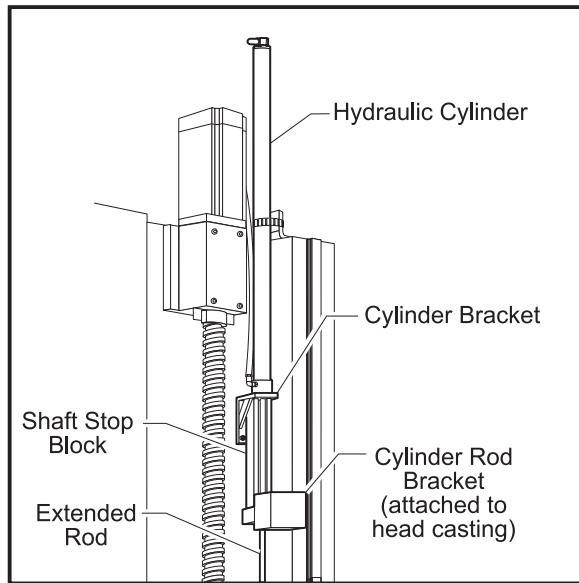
Z-axis motor and components for machines equipped with hydraulic counterbalance.
